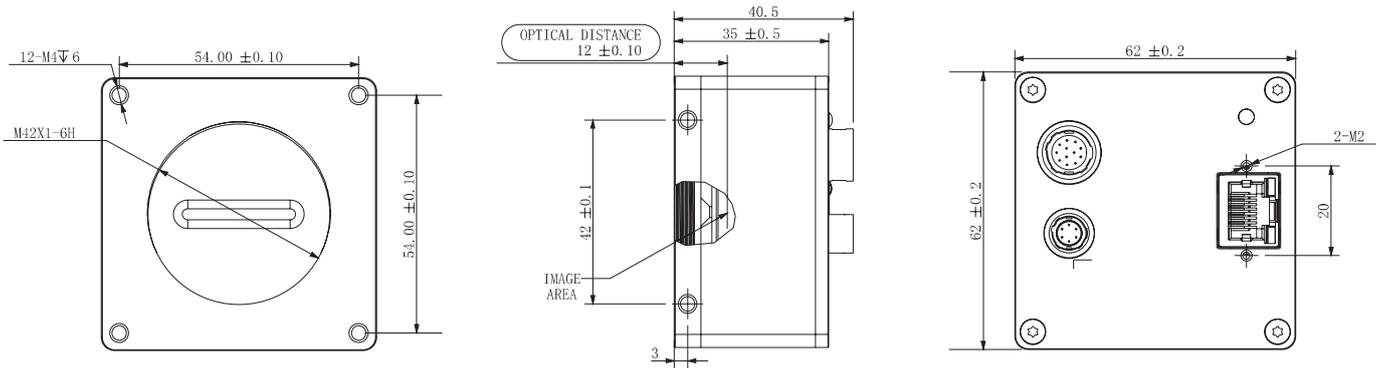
CMOSIS Sensor Cameras with 62 * 62 * 35.3mm housing.
